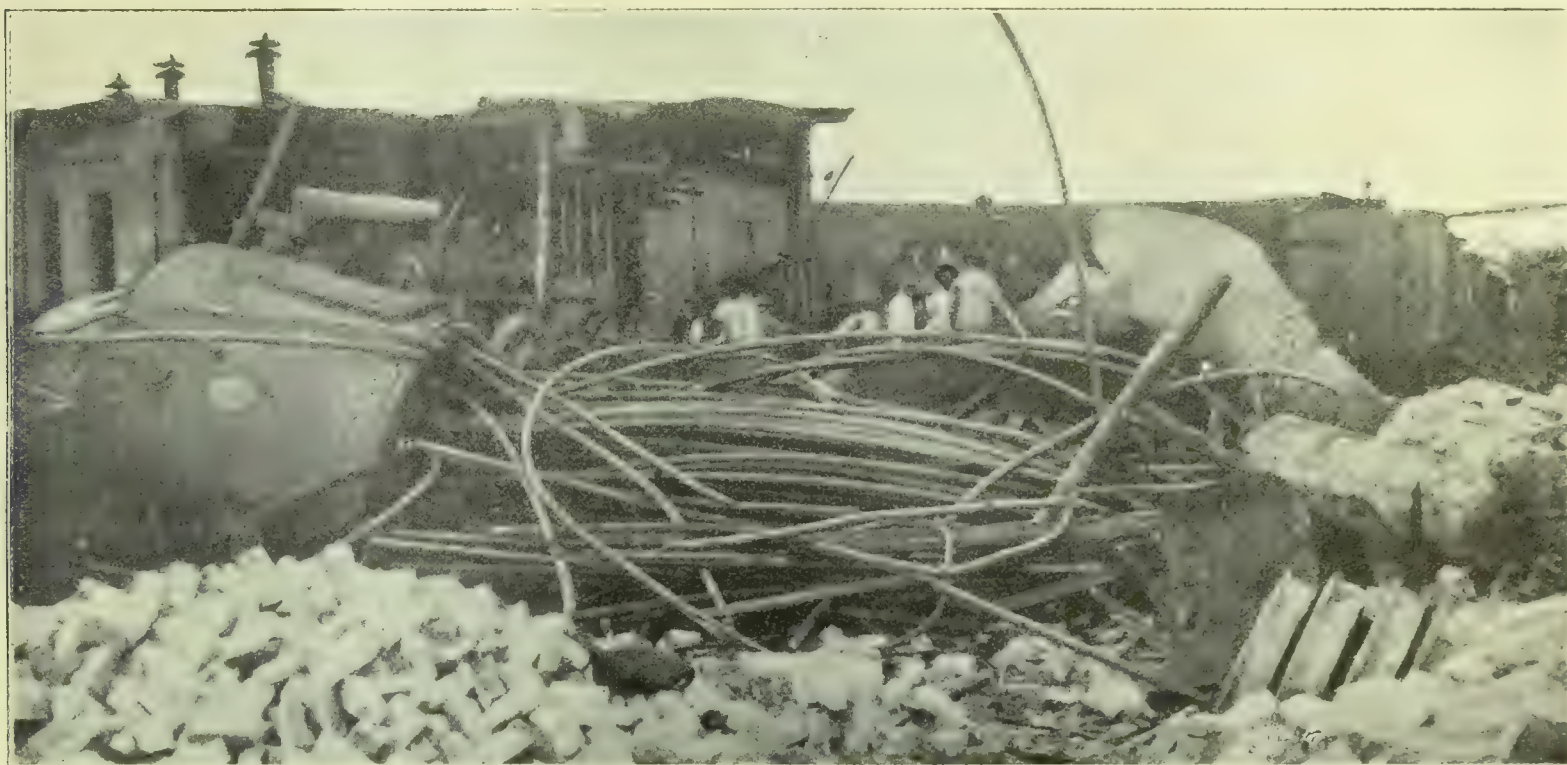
A DISASTROUS LOCOMOTIVE BOILER EXPLOSION.
